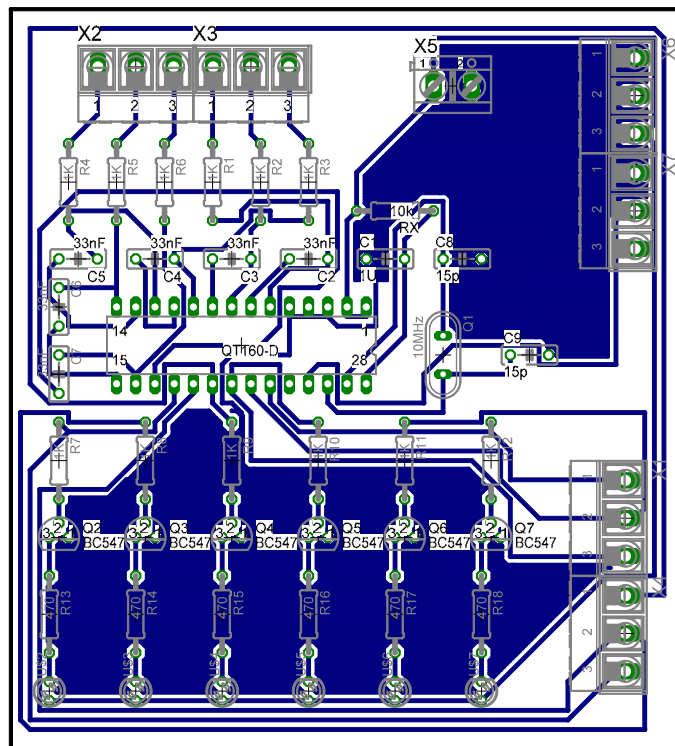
The QT160D 6-Channel Touch Sensor Sensor Circuit Board (Eagle CAD)
